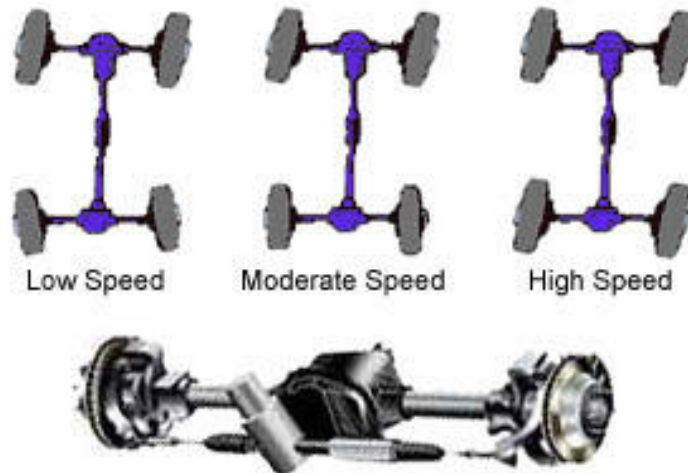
Delphi's QuadraSteer - Rear Wheel Steering [23]
